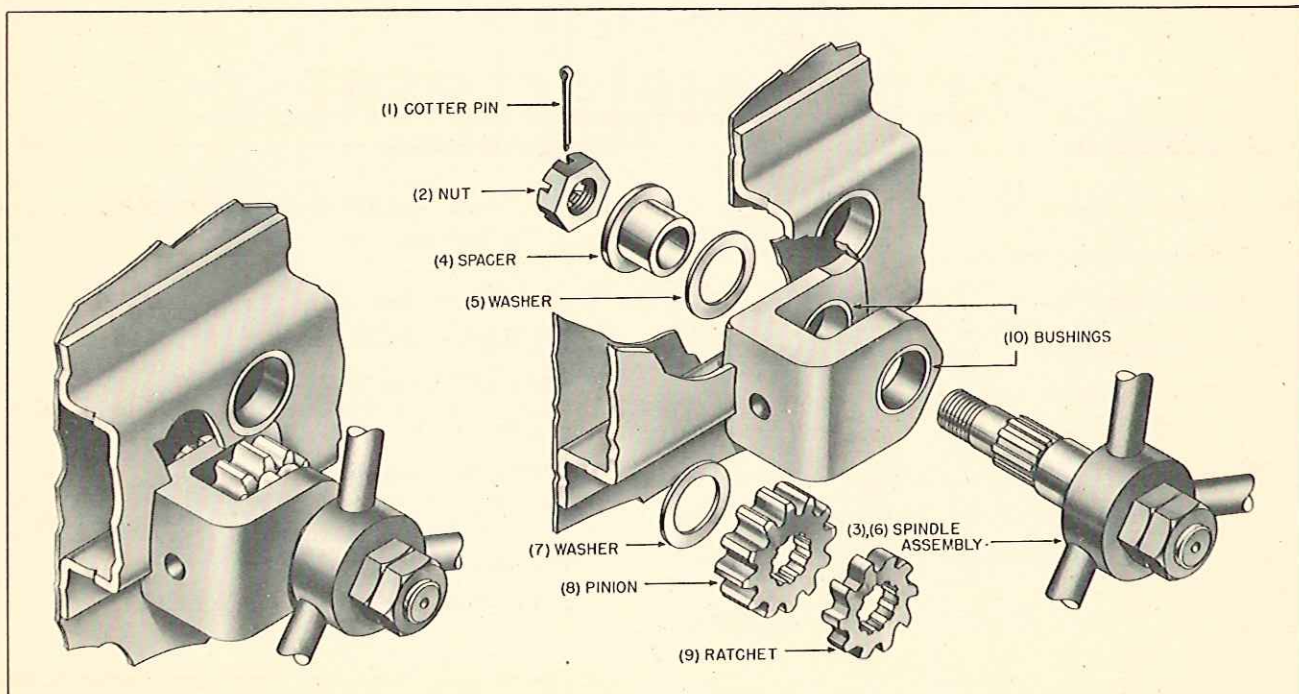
Pinion (inside handwheel), assembly and exploded views, TLD-3(ms) door.
